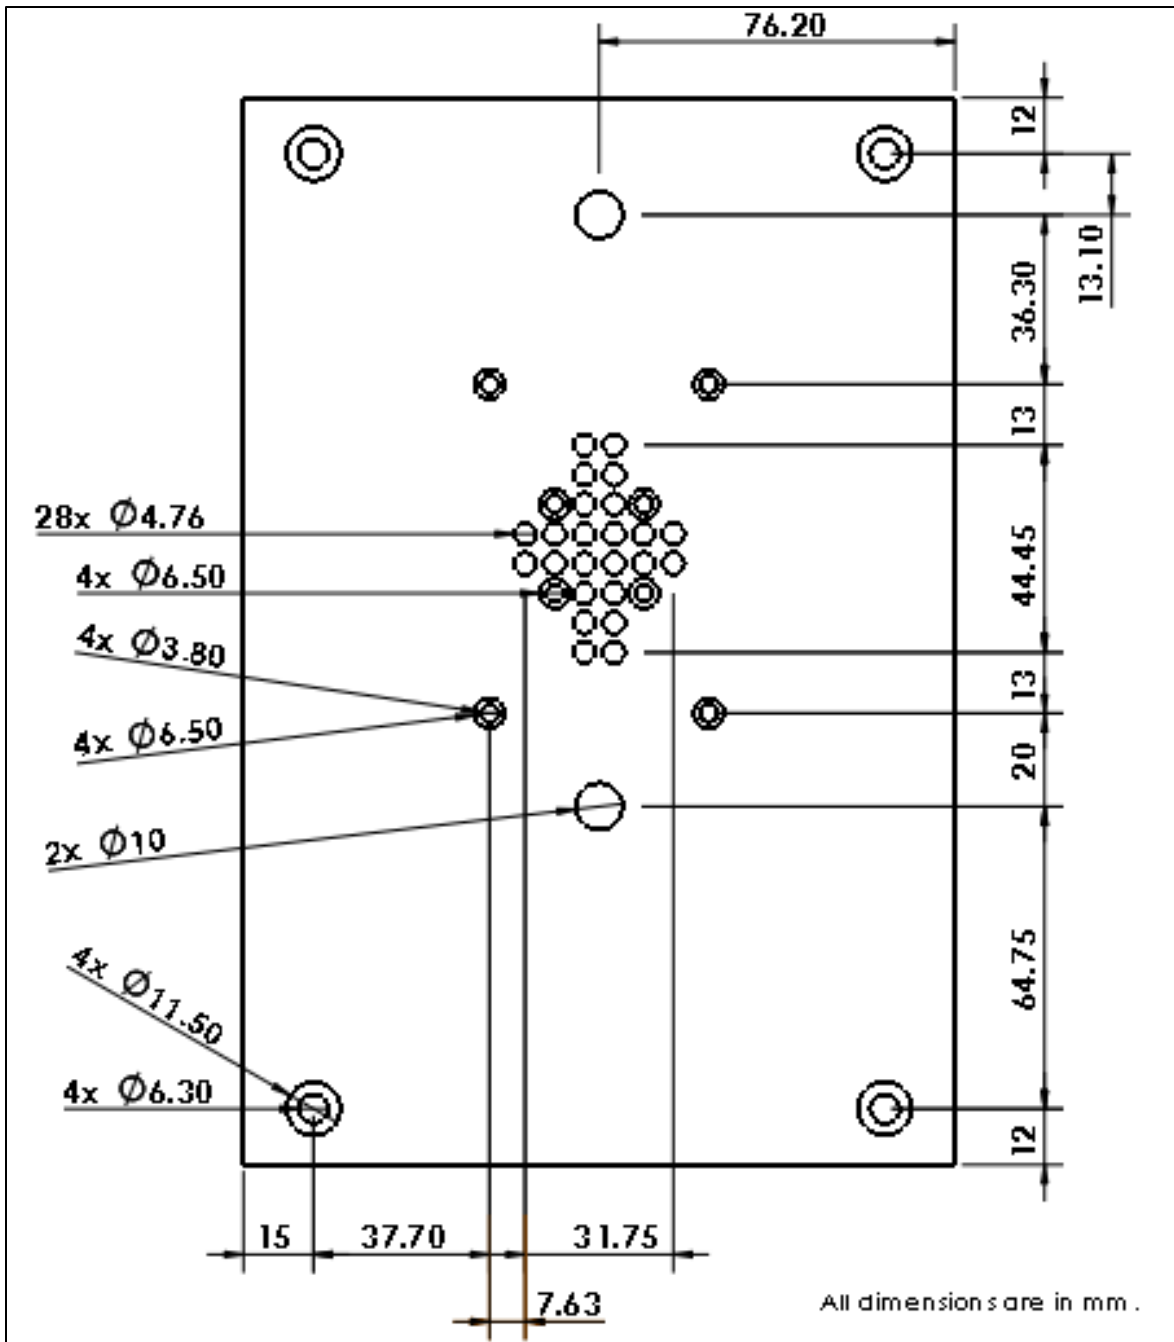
(e) Design with dimensions of sides # 1 and 3 of the payload
